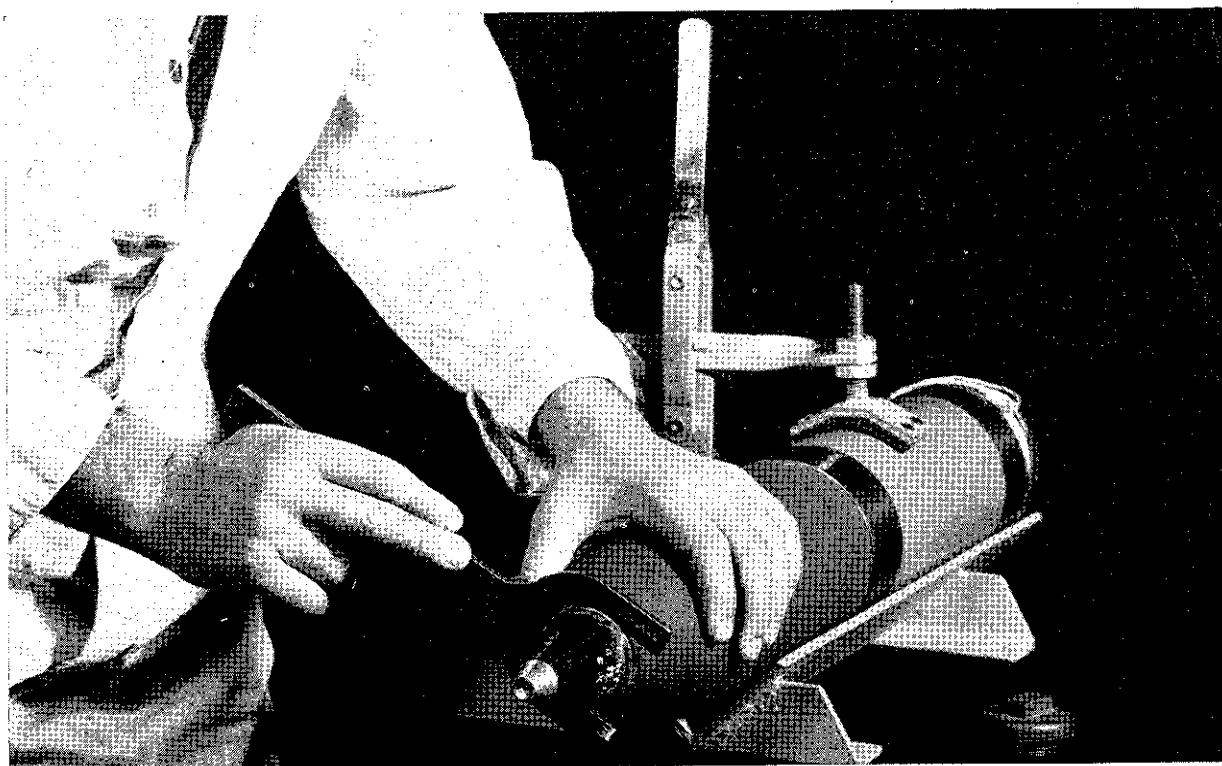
Assembly of Fuze and Head With Special Fuze Wrench.
